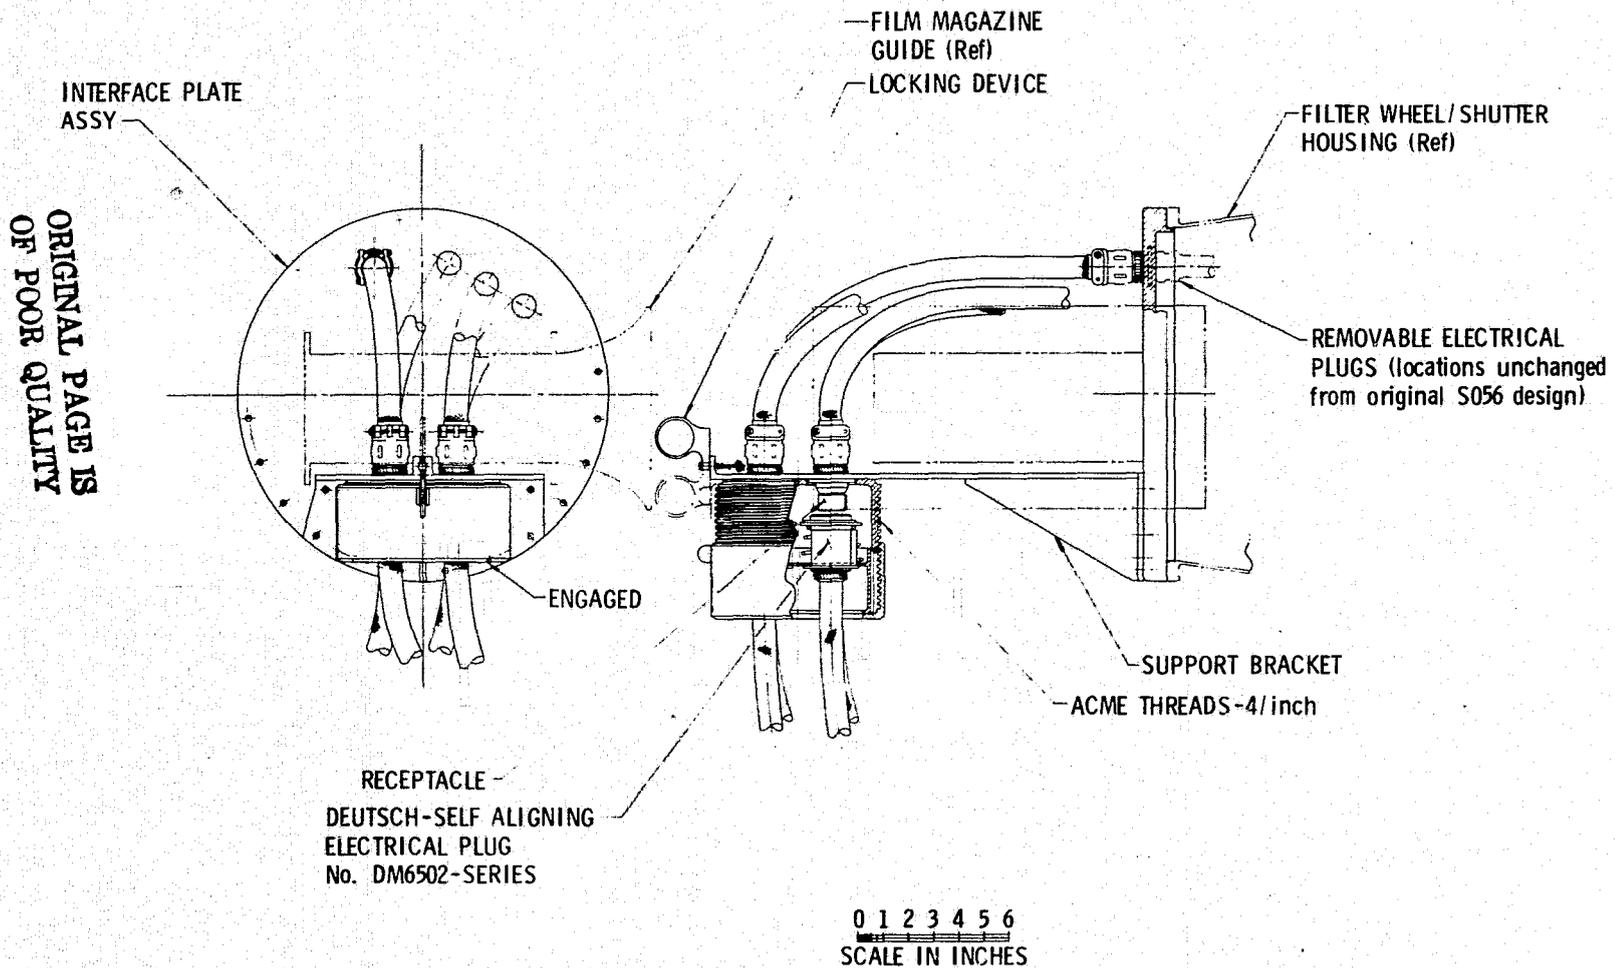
Shutter Housing/Aft Tube Interface Clamp
